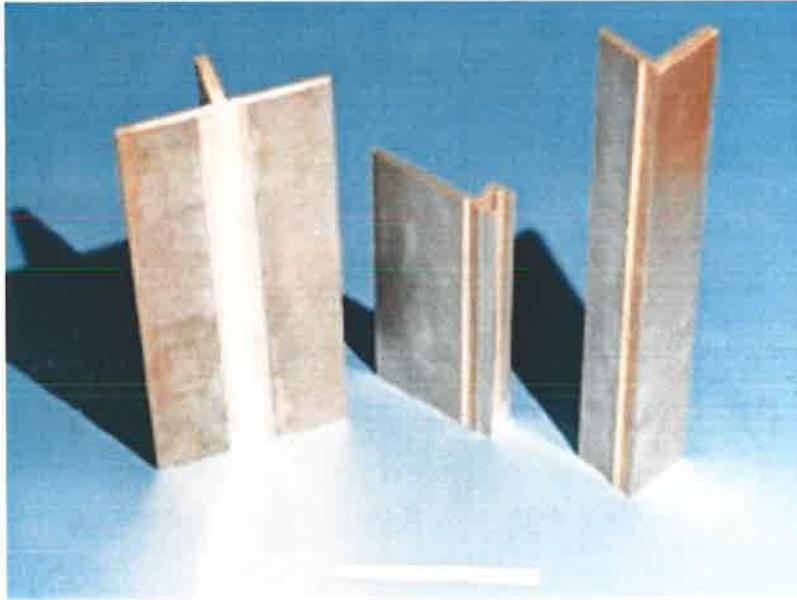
Some possible friction stir weld joint geometries apart from flat plate [73].
